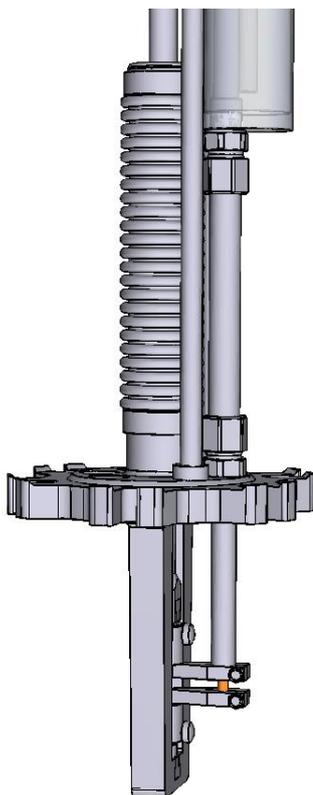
HLM extensometer for elongation and/or COD measurement. The extensometer is mounted to the cover of the HLM cell and it measures between bottom and top fitting located in load axis.
